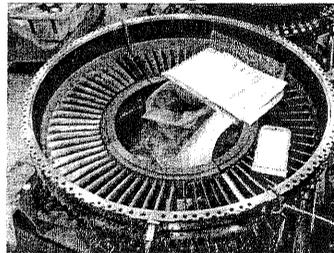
Reassembled Fan Stator Vanes/Blades Module
